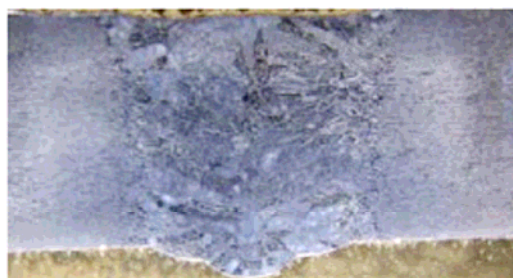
A cross-section of ATIG welded joint; plate thickness 8 mm.
